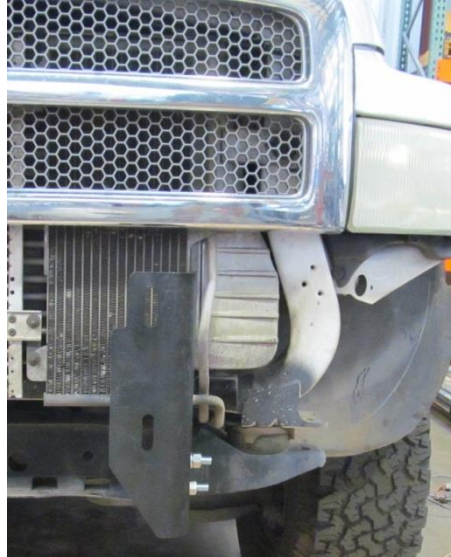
FRONT VIEW OF DRIVER SIDE FRAME MOUNT
